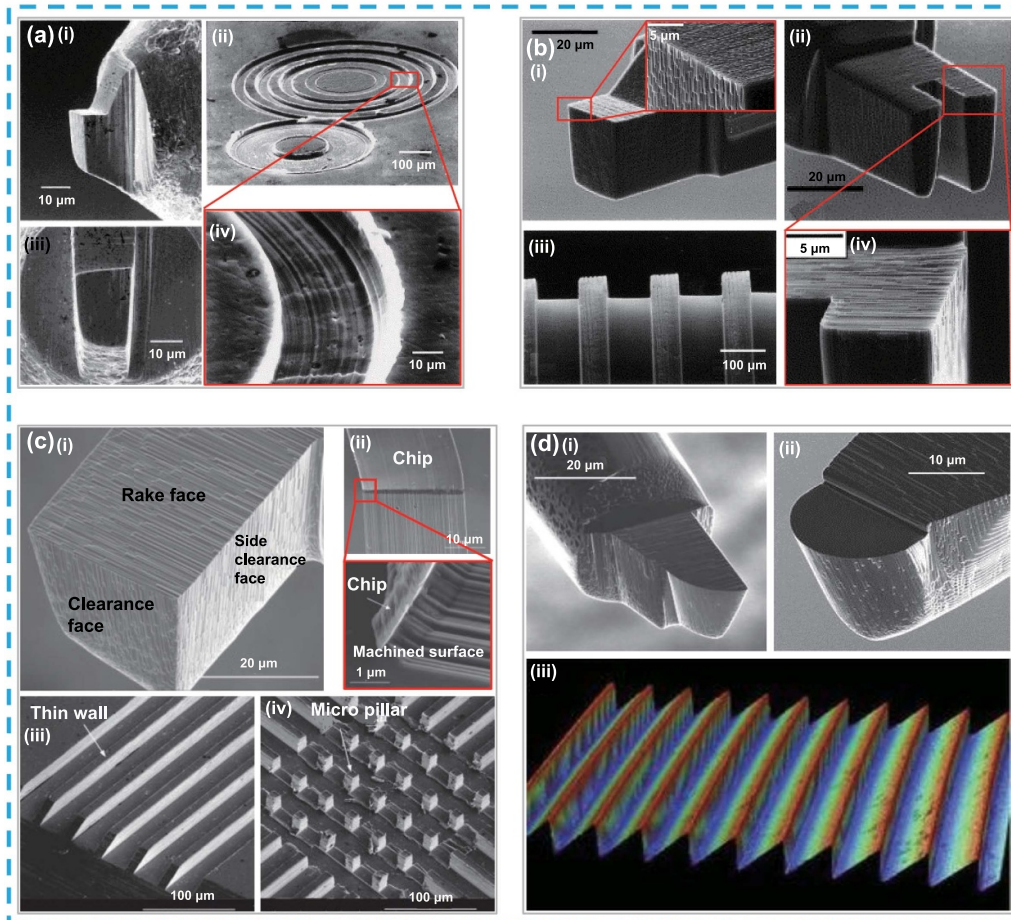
Different micro tools fabricated by FIB technology and their application in the machining of micro structured arrays: (a) micro cemented carbide turning tool and the machined microloops. Reprinted from [179], Copyright © 2000 Elsevier Science Inc. All rights reserved. (b) Micro diamond turning tool and the machined grooves. Reprinted from [149], Copyright © 2002 Elsevier Science Inc. All rights reserved. (c) Rectangular micro diamond turning tools and the machined microstructures and chip. Reproduced from [150]. © IOP Publishing Ltd All rights reserved. (d) Round nosed micro diamond turning tools and the machined Fresnel microstructures. Reproduced from [151]. CC BY 4.0.
